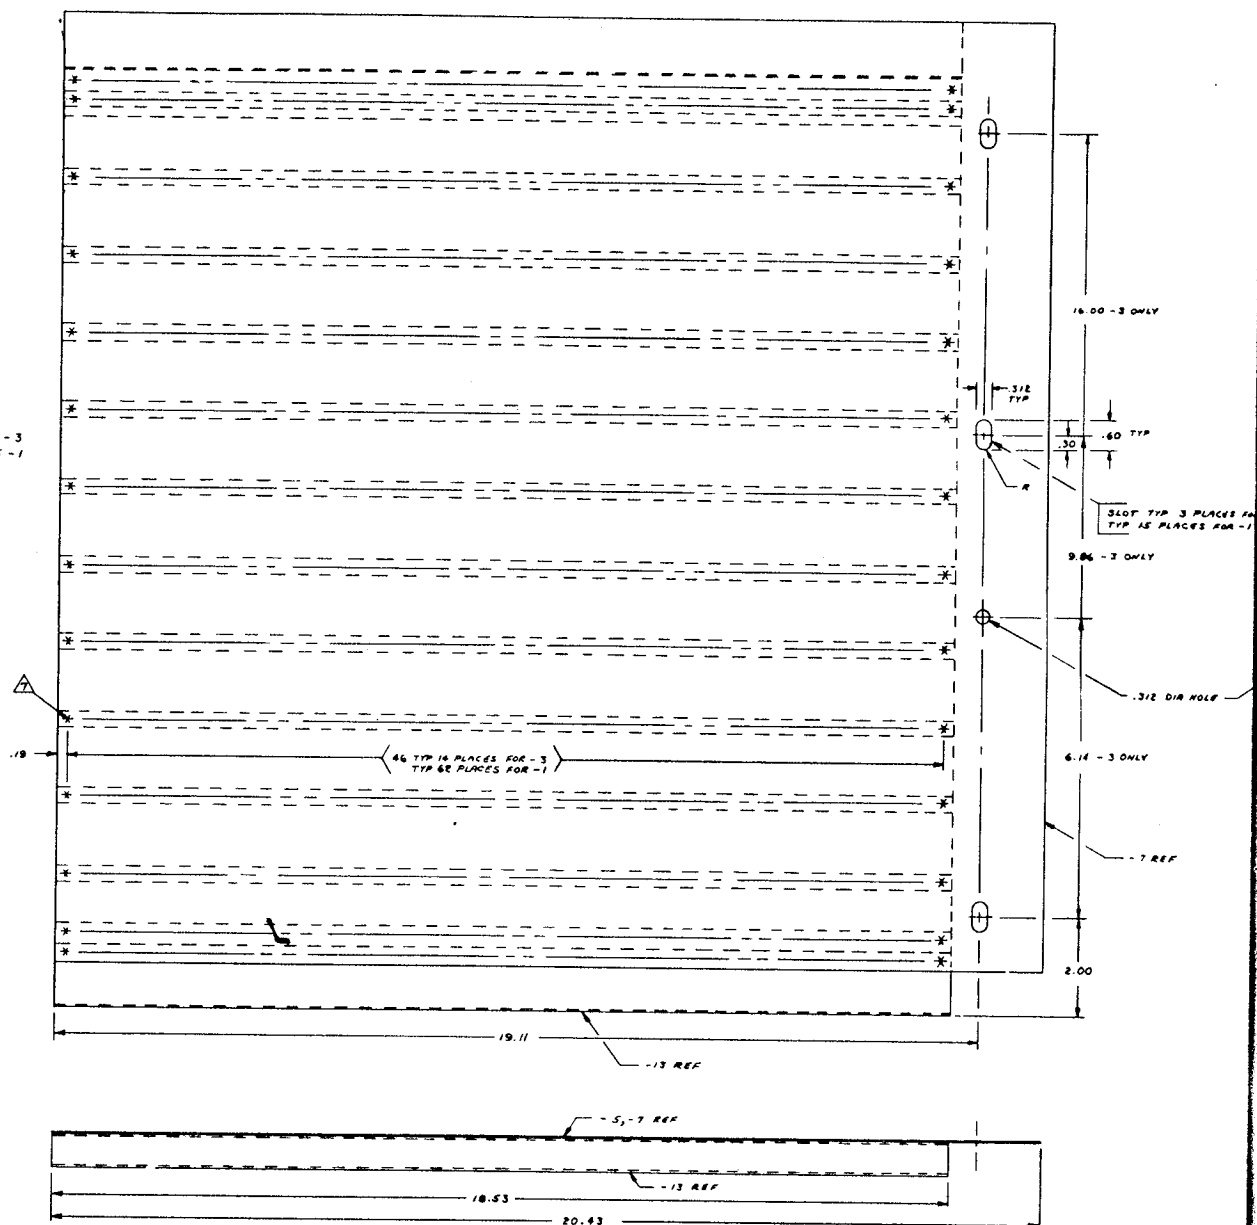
METALLIC PANEL ASSEMBLY - EDGE FASTENER
